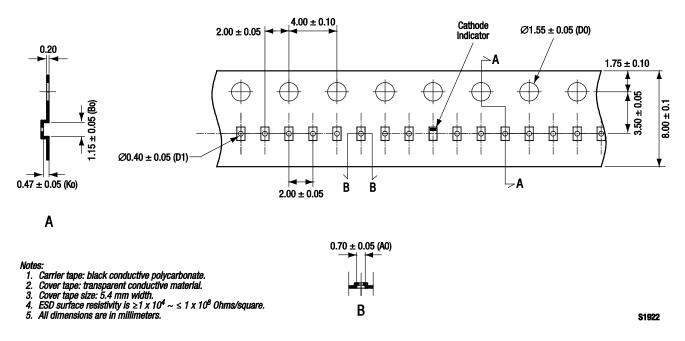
SMP1330-040LF Tape and Reel Dimensions
